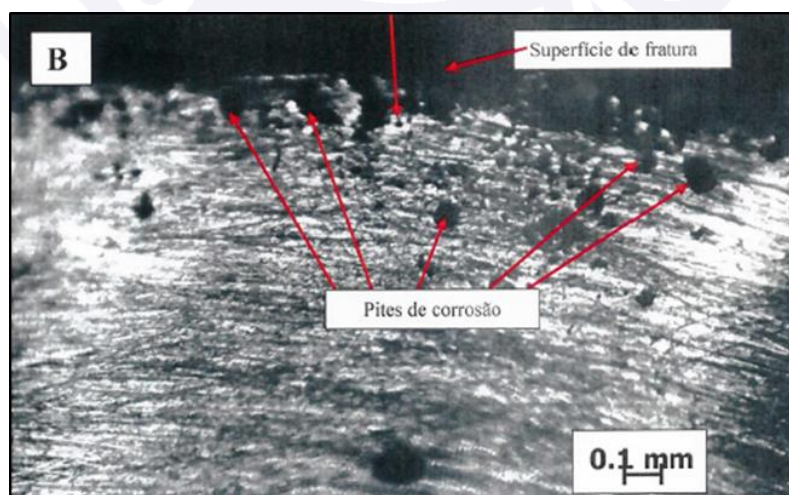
Close-up image of the Py Tube fracture showing the pits of corrosion.
